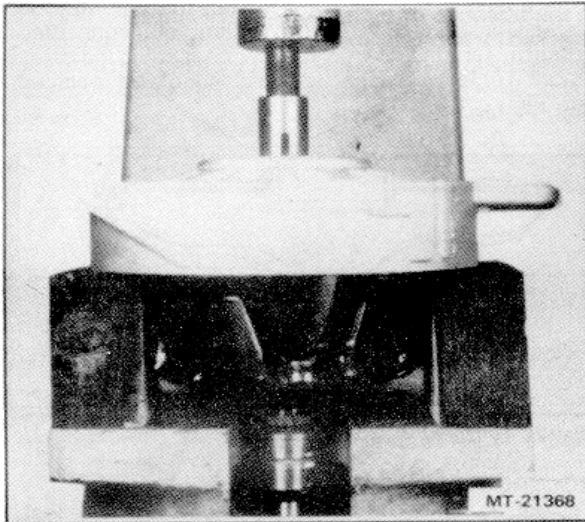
Removing Drive End Housing From Rotor Shaft.
